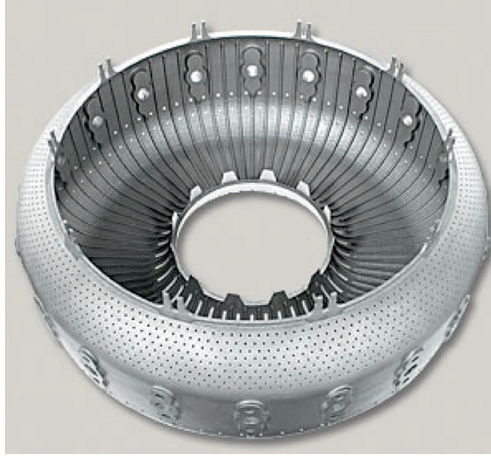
Combustion chamber element: selective laser melting (SLM)
